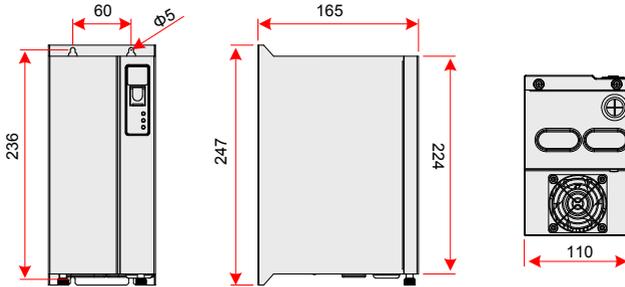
Exterior dimensions of MDBUN series braking units (mm)
